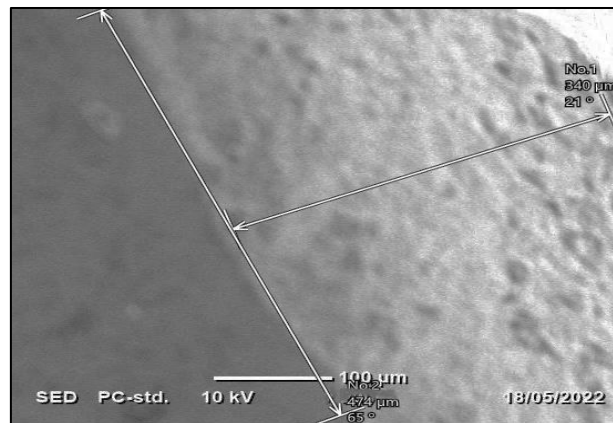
Flank wear of the 2nd cutting tool at 150X magnification (50 m/min cutting speed, 0.525 mm/rev feed, and 1.25 mm depth of cut)
